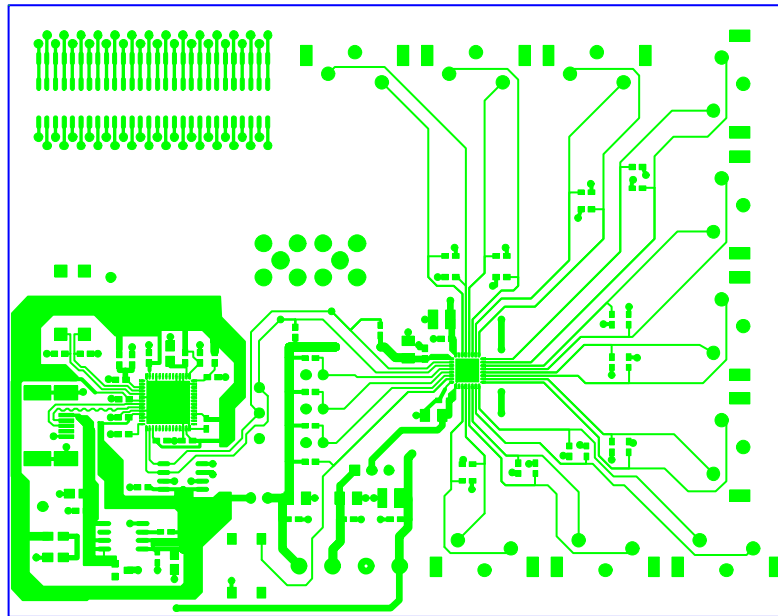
Component Side Printed Circuit Board (PCB) Drawing
